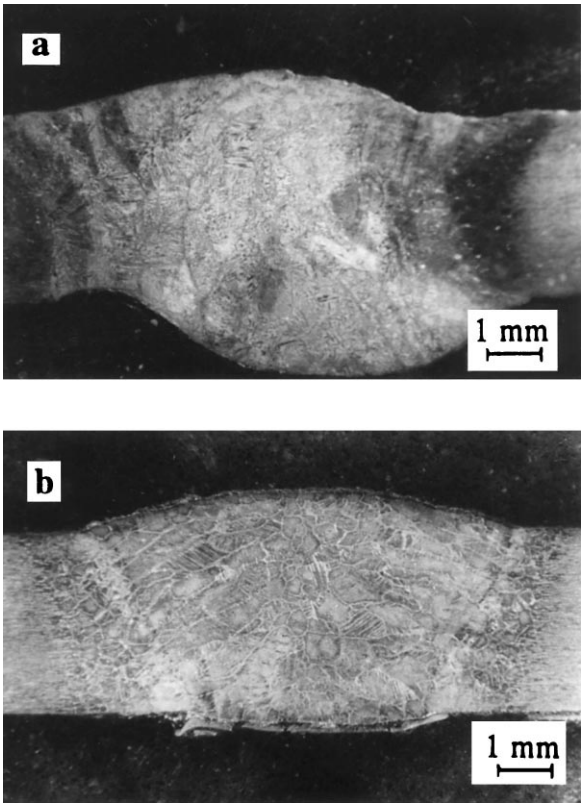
The macrostructure of: (a) an SMAW weld; (b) a GTAW weld.
